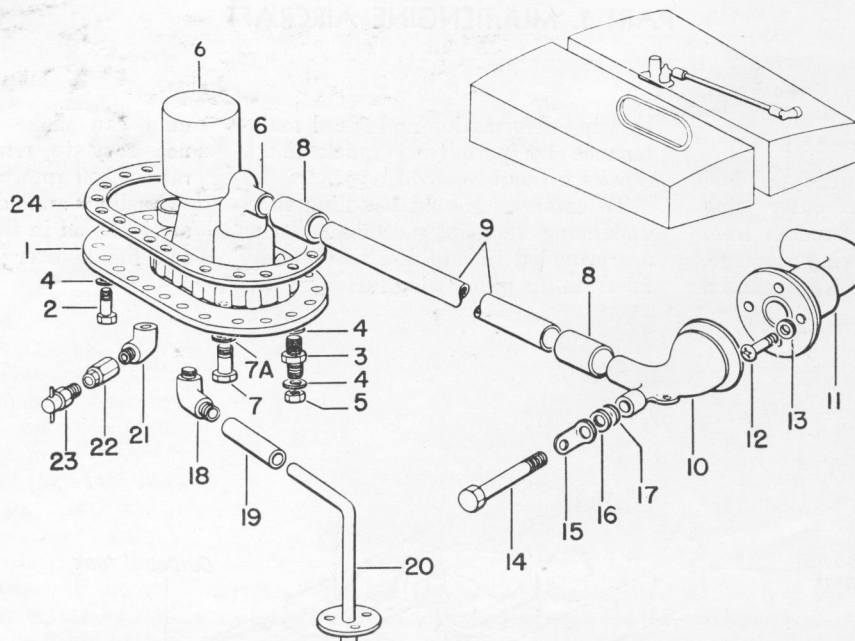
The fuel booster pump and fittings of the 2-0-2 include: (1) booster pump adapter plate; (2) bolt; (3) stud; (4) washer; (5) nut; (6) Thompson booster pump type B5C; (7) bolt; (7A) washer; (8) hose; (9) tube assembly; (10) outlet fitting; (11) outlet fitting assembly; (12) screw; (13) washer; (14) bolt; (15) bonding tap; (16) washer; (17) O-ring packing; (18) elbow; (19) hose; (20) overboard drain assembly; (21) elbow; (22) reducer; (23) drain cock; (24) gasket.
